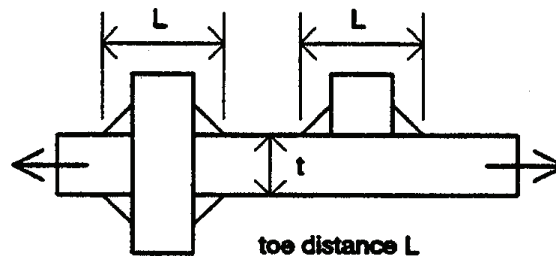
Weld toe parameters used to define the thickness reduction factor.
